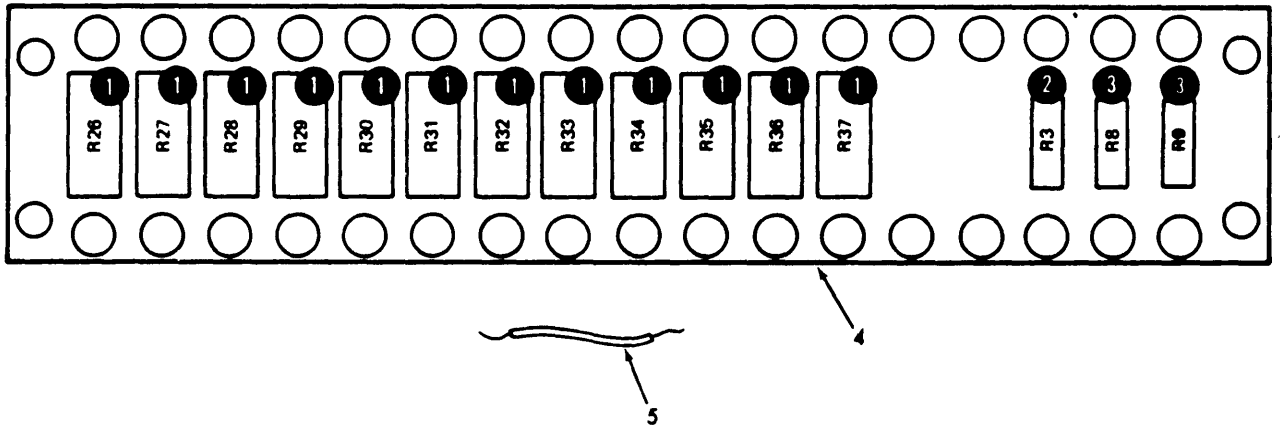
TERMINAL BOARD ASSEMBLY TB2 COMPONENT PARTS (ASSY P/N 12303124).
